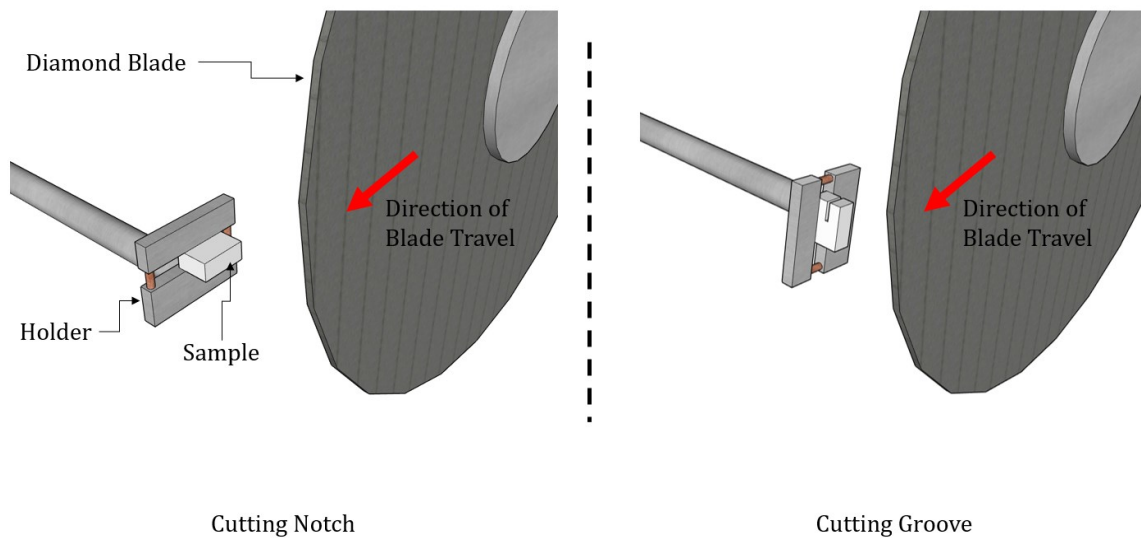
Schematic showing the procedure for machining the notch and groove of the DCB samples.
